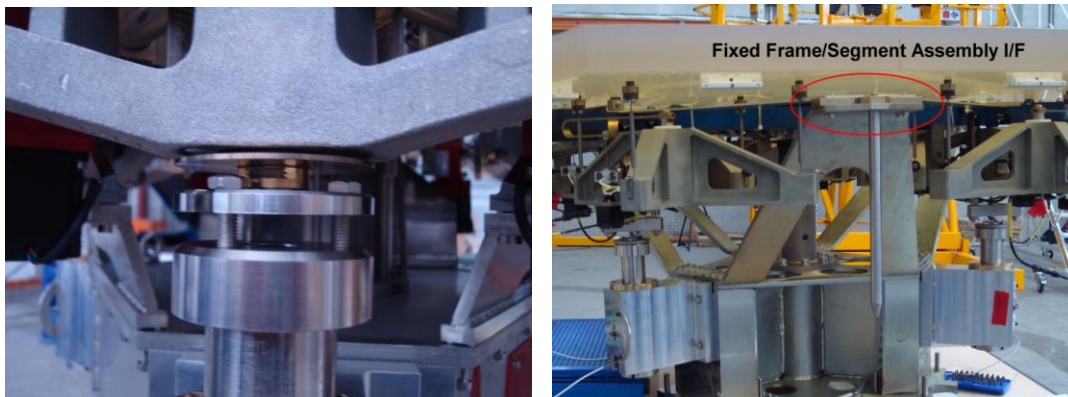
Screwed PACT/Segment Assembly I/F (left) and Fixed Frame/Segment Assembly I/F (right) with difficult access
